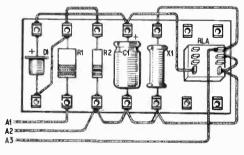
Tag board assembly and wiring details for the Lamp Protector
